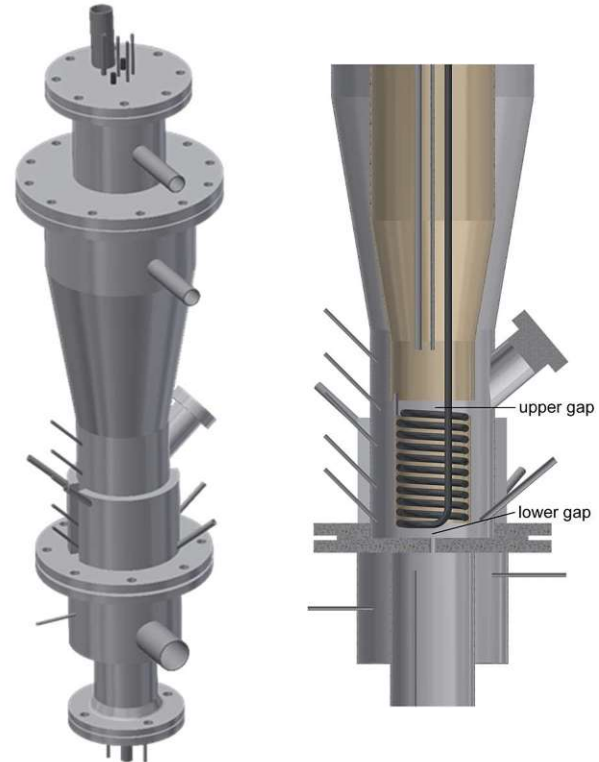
3D-CAD drawing of the ICFB reactor: isometric view of the whole reactor (left), sectional view of the lower reactor part (right)
